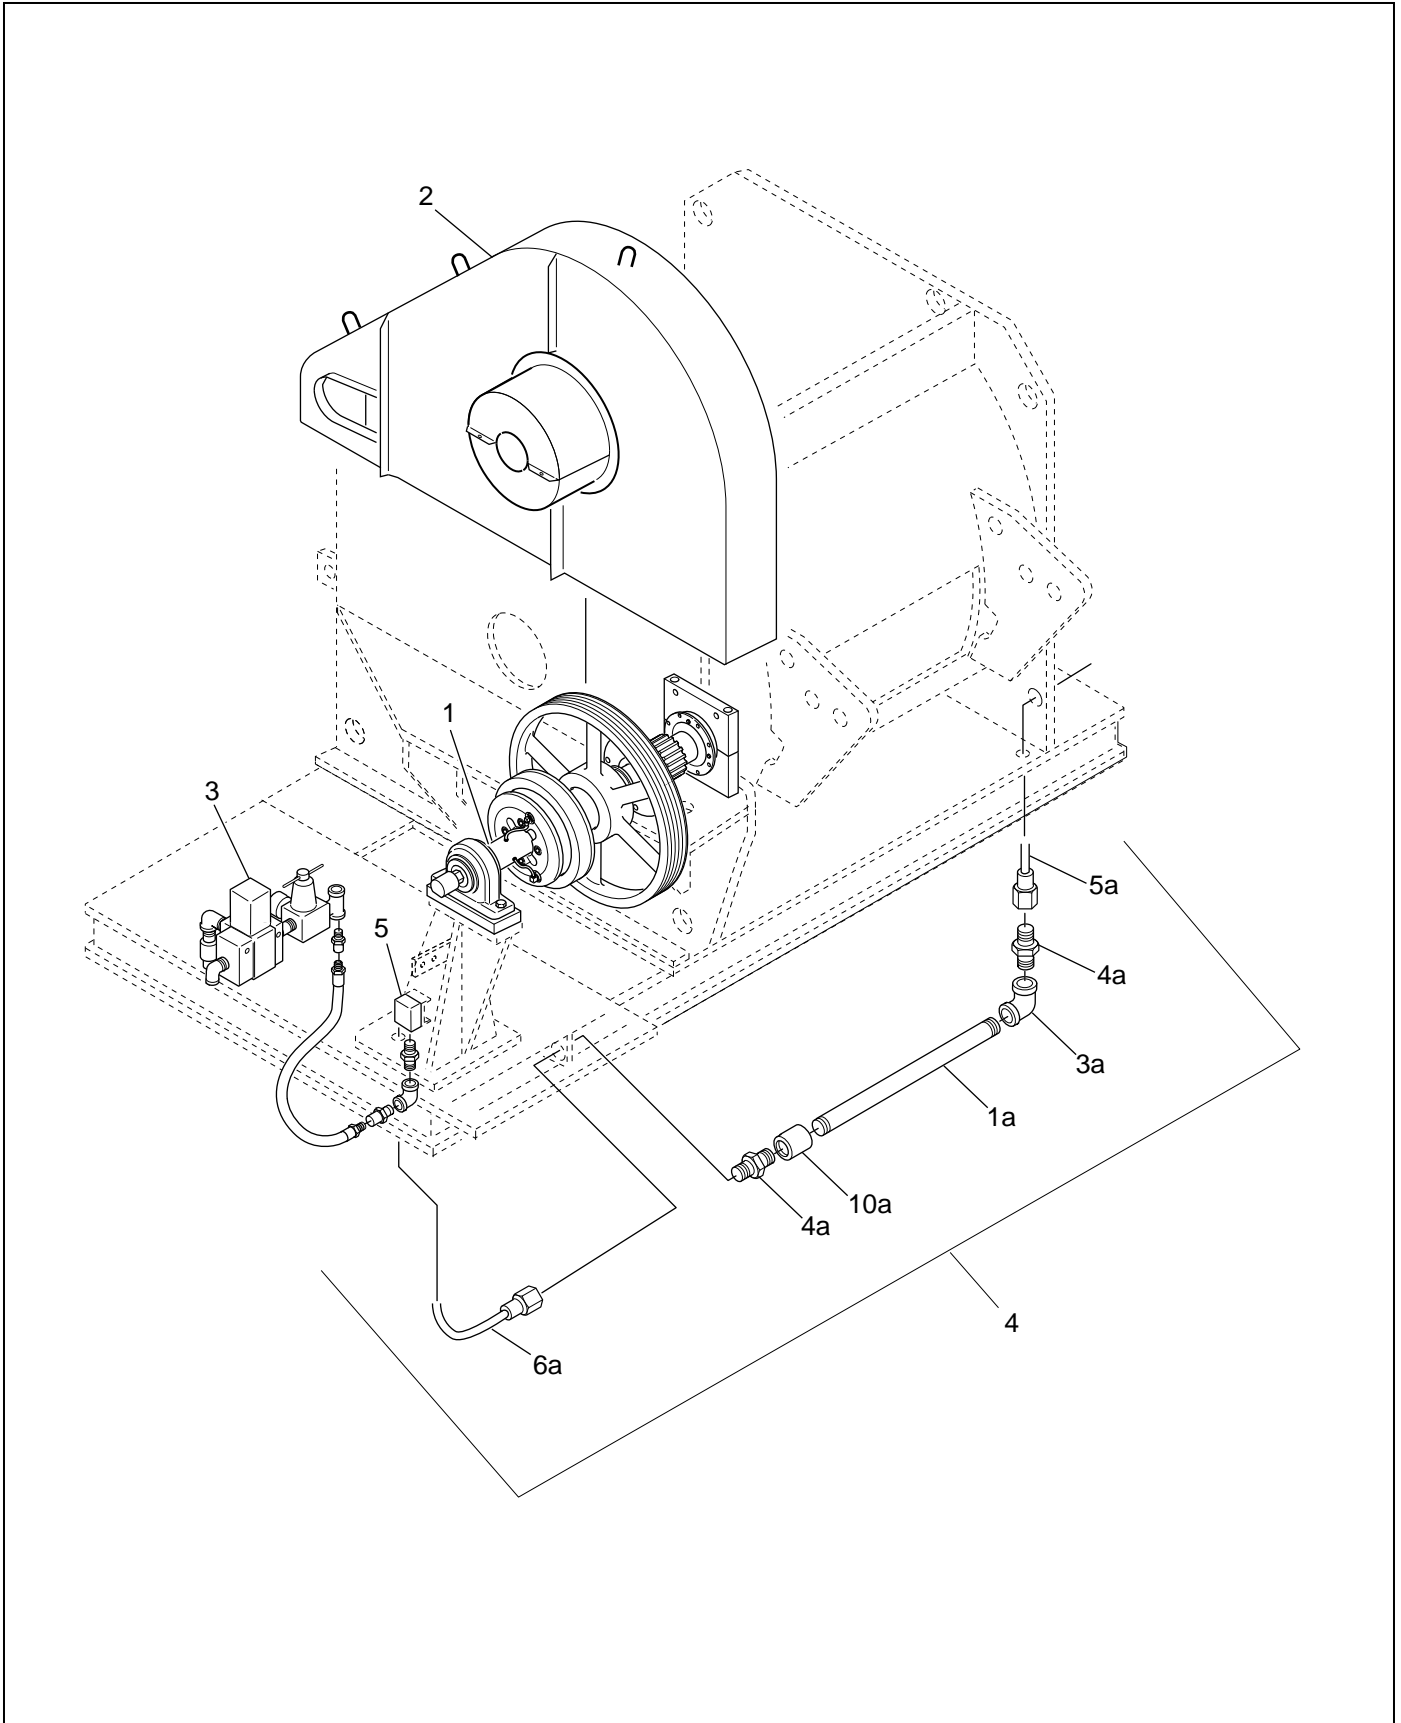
S.O.P. – Drive Shaft with Clutch and S.O.P. – Airline – Clutch (#646180, #646181 and #358241)
